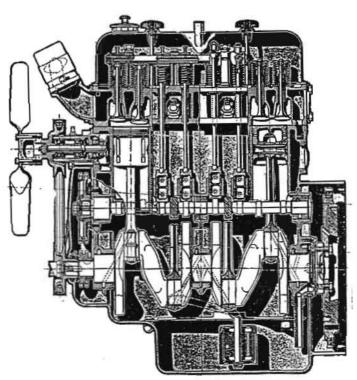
Sectional arrangement of 918 c.c. side-valve engine (type USHM)
